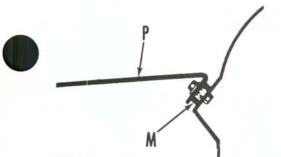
On some models, rear engine mounts (M) are only accessible from below. Mounting plate (P) must be removed with the engine.
